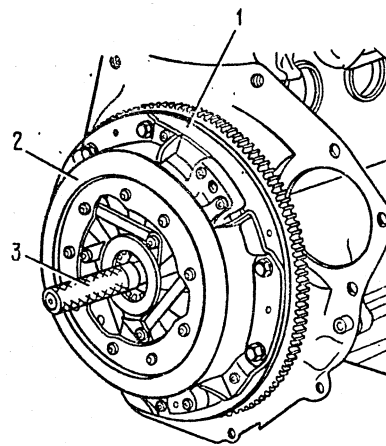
Aligning the Driven Disc with Mandrel
